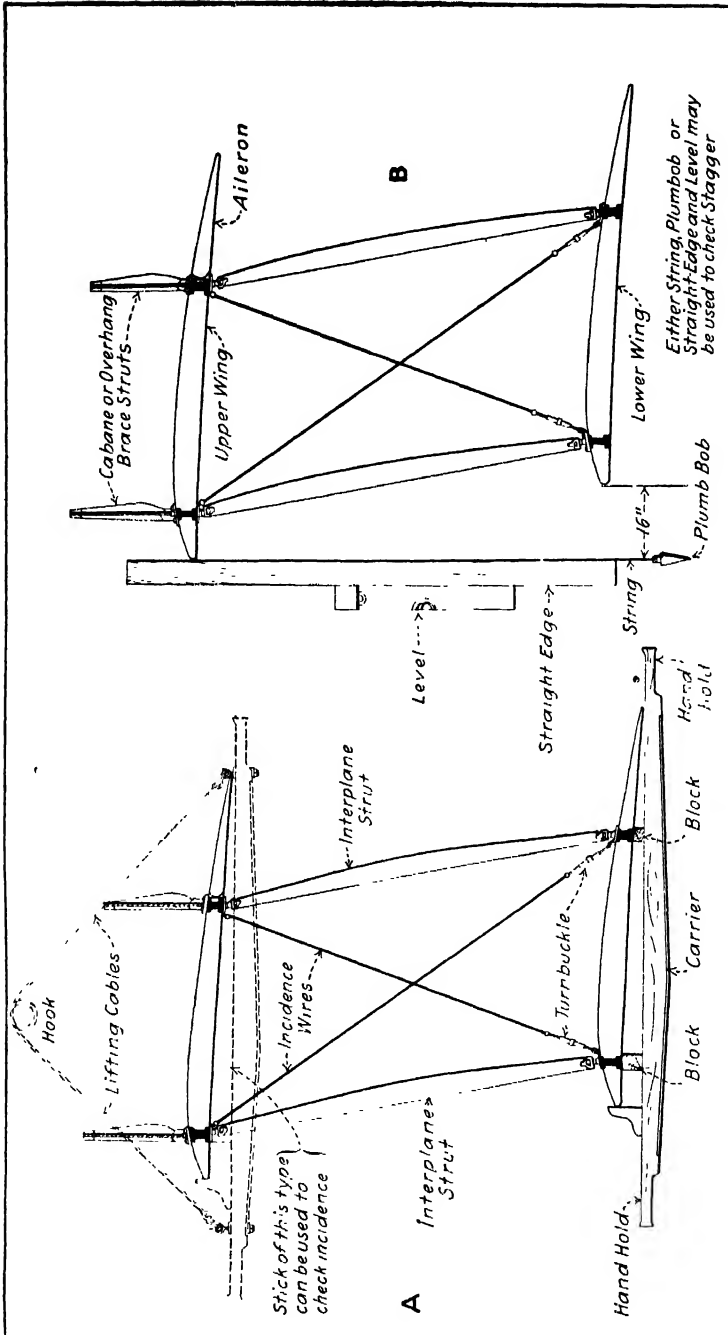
Carrier for Panel Assembly at A and B. How to Test for Stagger.
